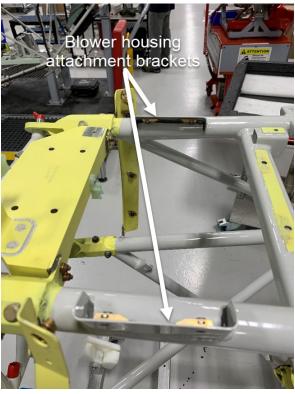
Oil Cooler Blower Housing Attachment Brackets (2 places)
